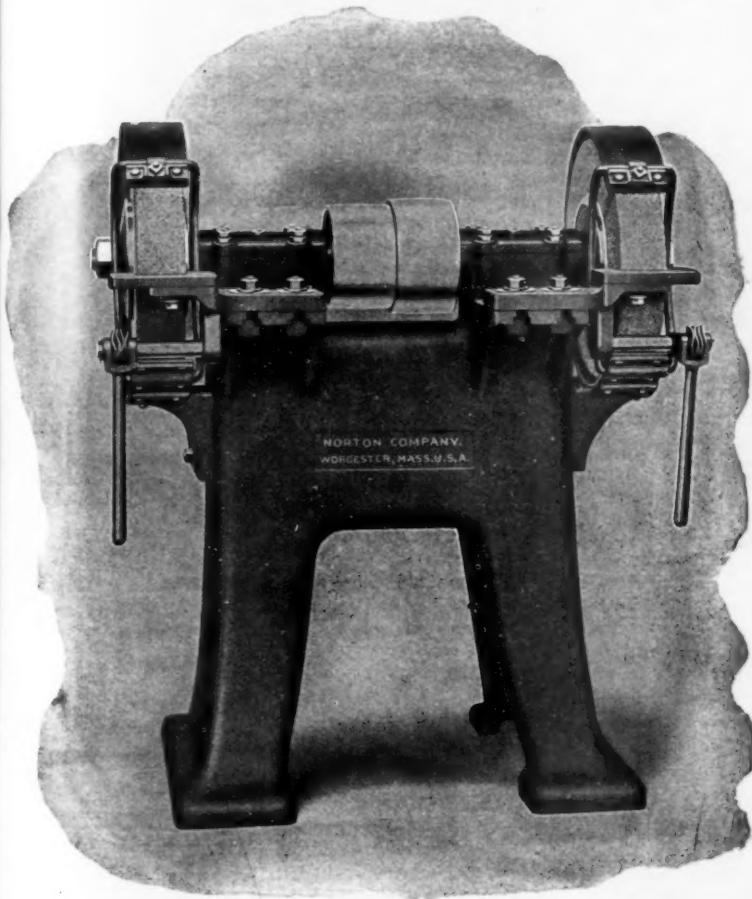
GRINDING WHEEL STAND, FLOOR TYPE, EQUIPPED WITH PROTECTION HOODS.
